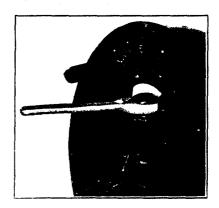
Wrench 92251 for Spindle Bearing Dust Cap
